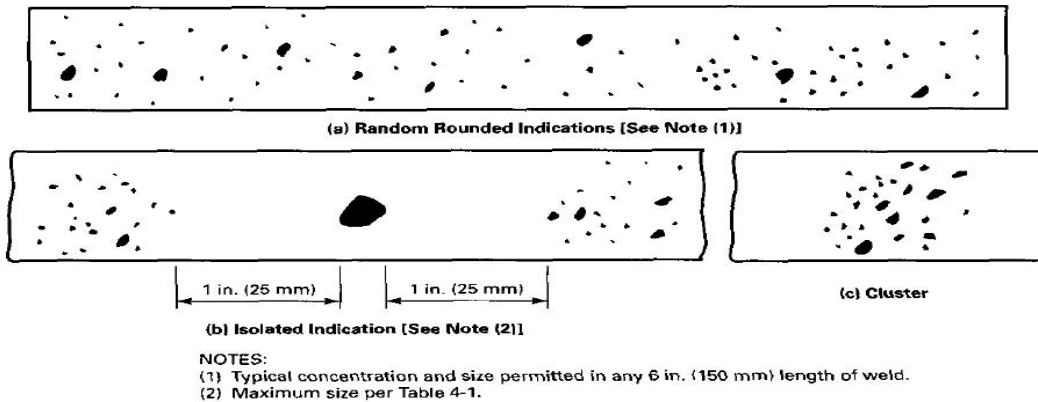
1. 6. Charts for t equal to over $3/4$ in. to 2 in. (19 to 50 mm) inclusive
